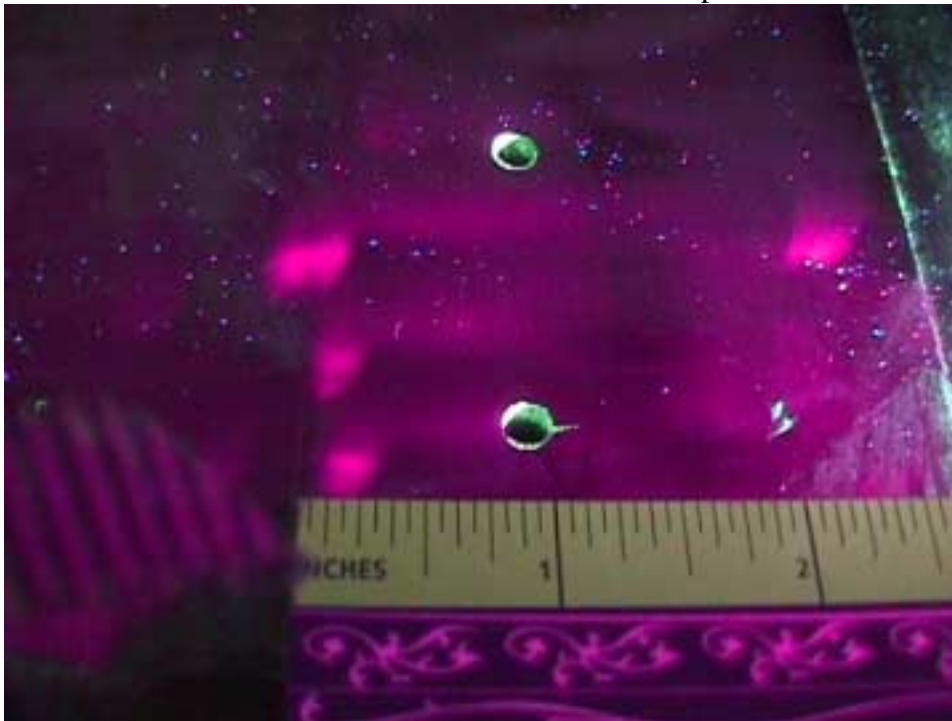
Crack P3 under outboard aft external doubler panel. Crack is 300'' in length. and corresponds with crack X3
